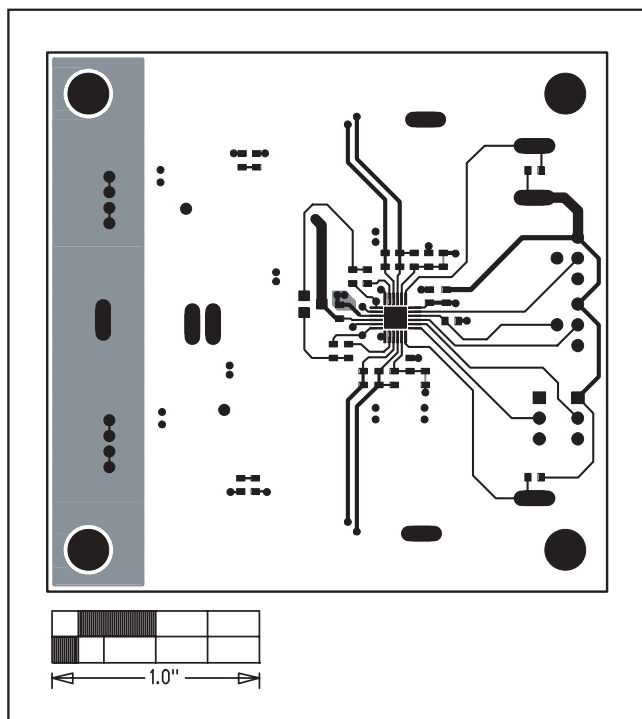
MAX8716 EV Kit PC Board Layout—Solder Side
